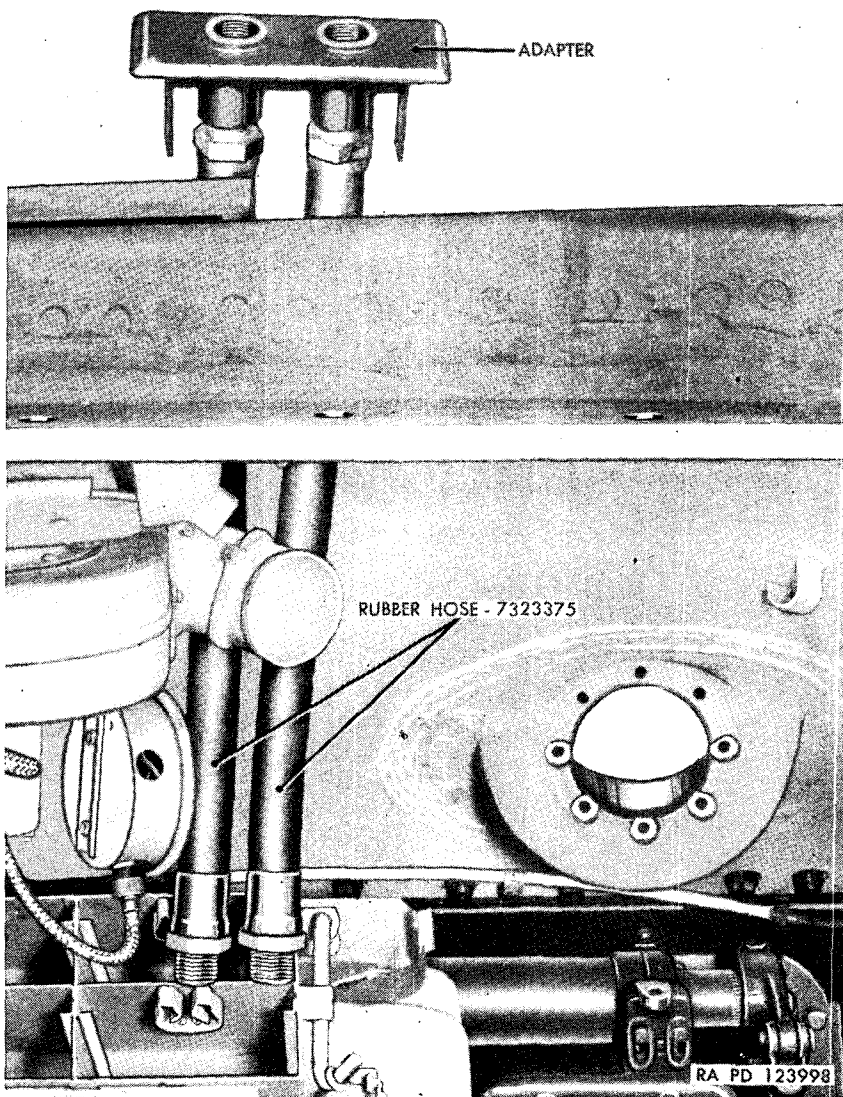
Hydraulic-cylinder inlet and outlet pipe adapter partially installed.
